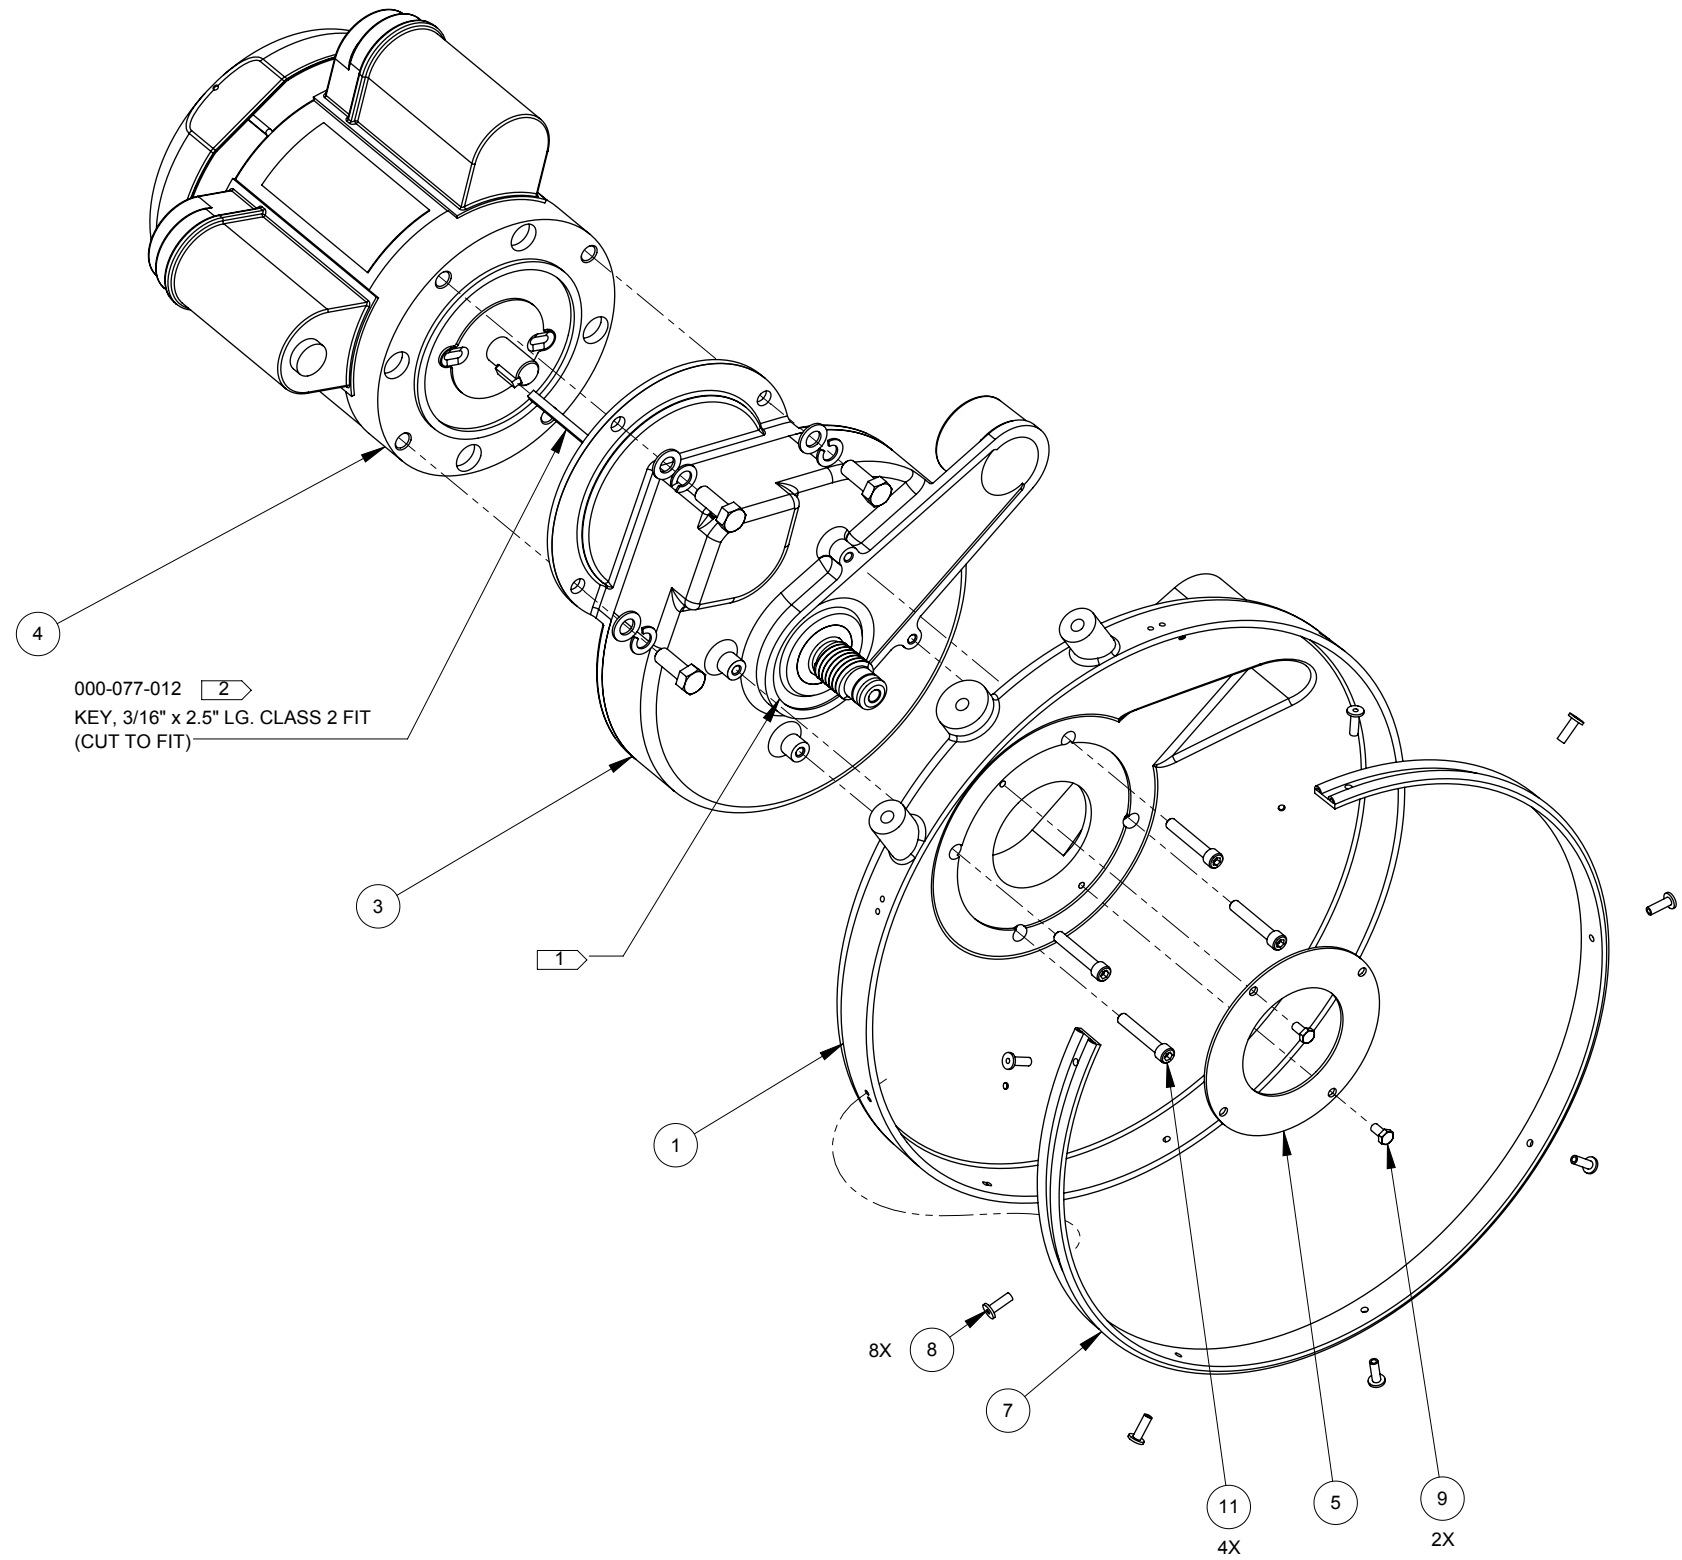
Base and Drive Train Assembly - View 2 of 2
